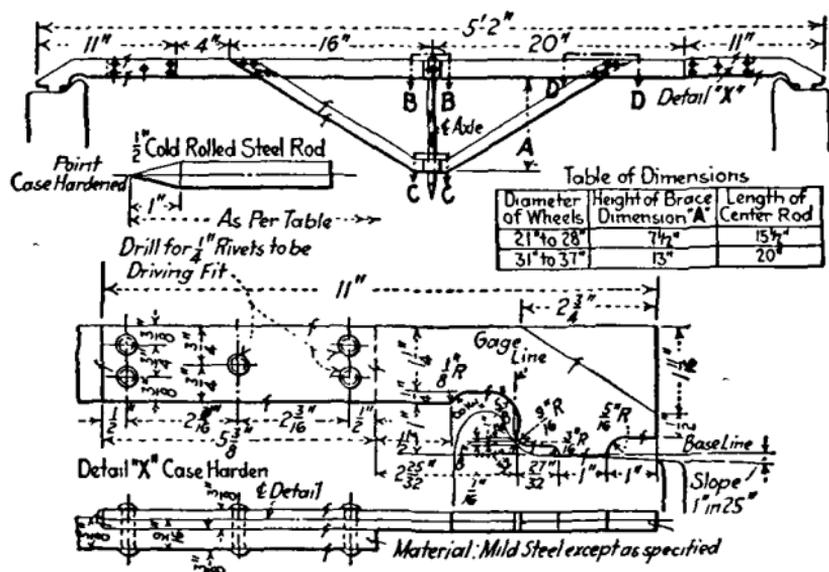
A.E.R.E.A. standard wheel mounting and check gage.
